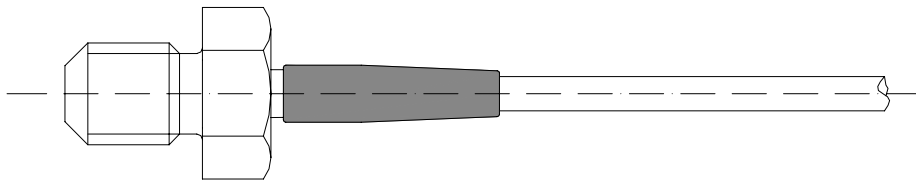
water thermocouple – M10 thread – Rotax engines (side view)
